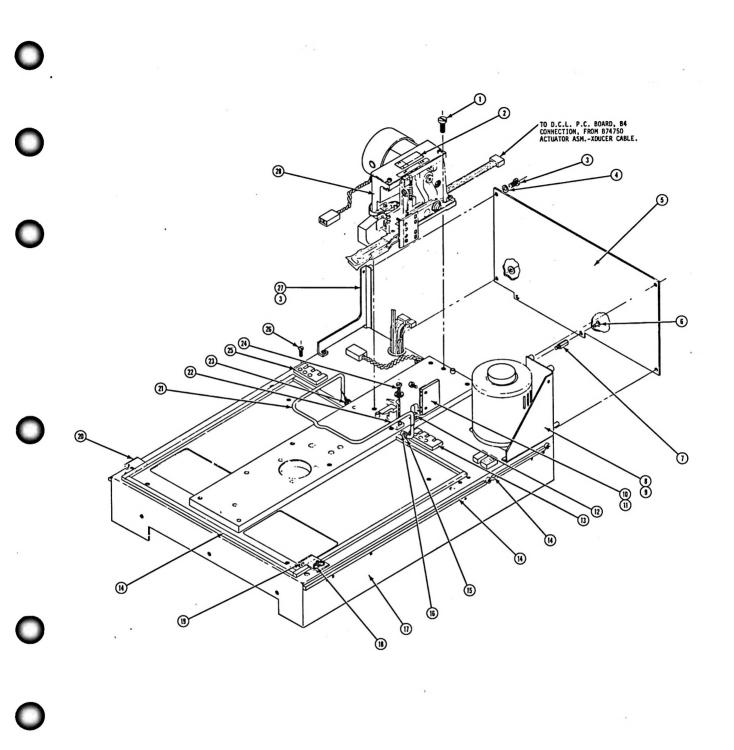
Chassis Assembly, Top View (74770) Revised: July 15, 1976
